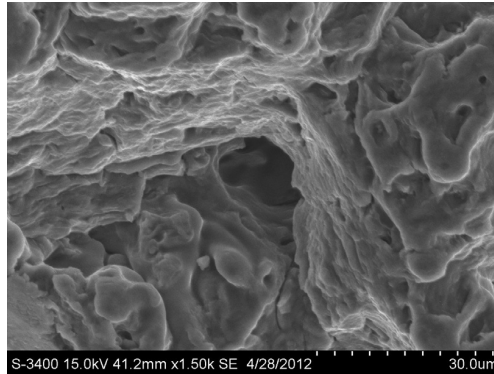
Sudden fracture zone of fatigue fracture.
